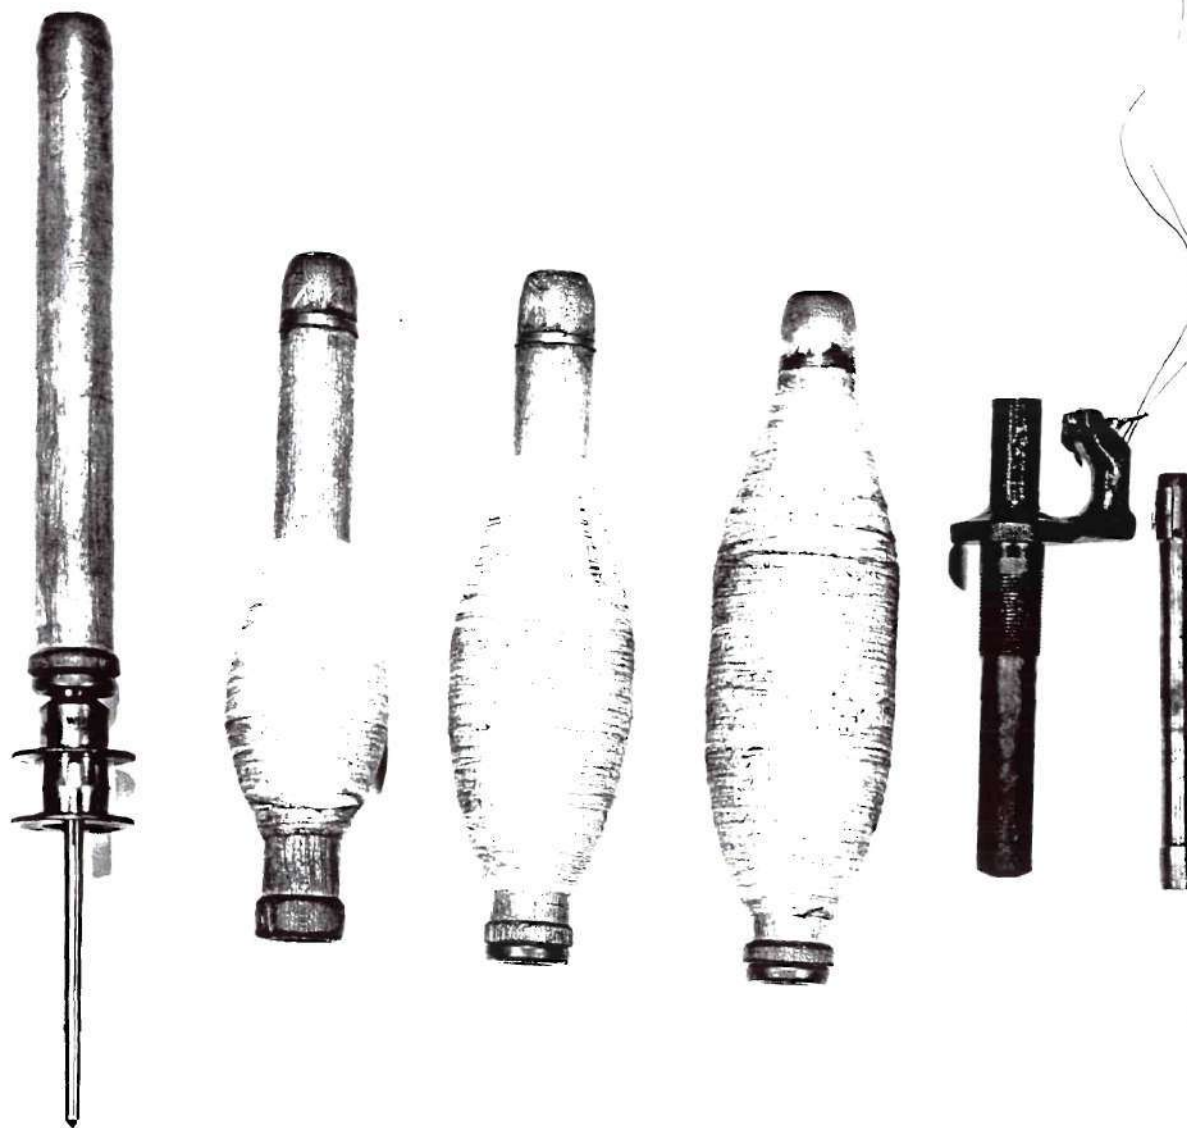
SPINDLE, BOBBINS, OIL RESERVOIR, AND BOLSTER
